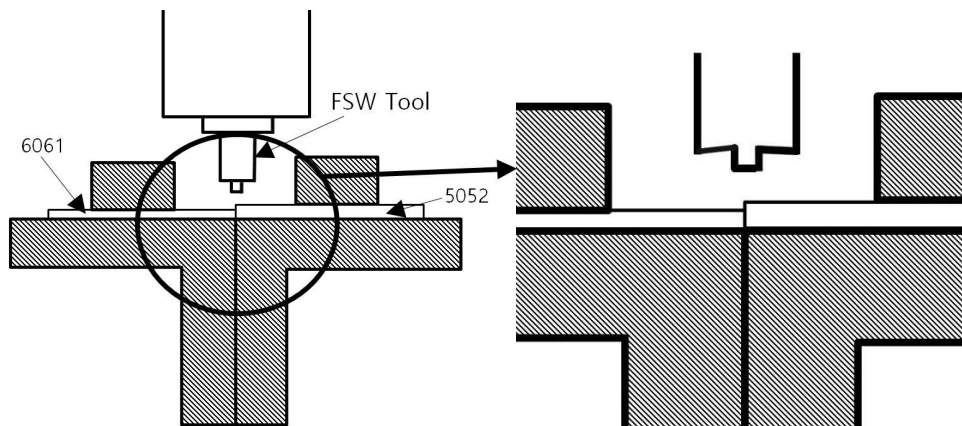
Zig system used for FSW butt welded joint
